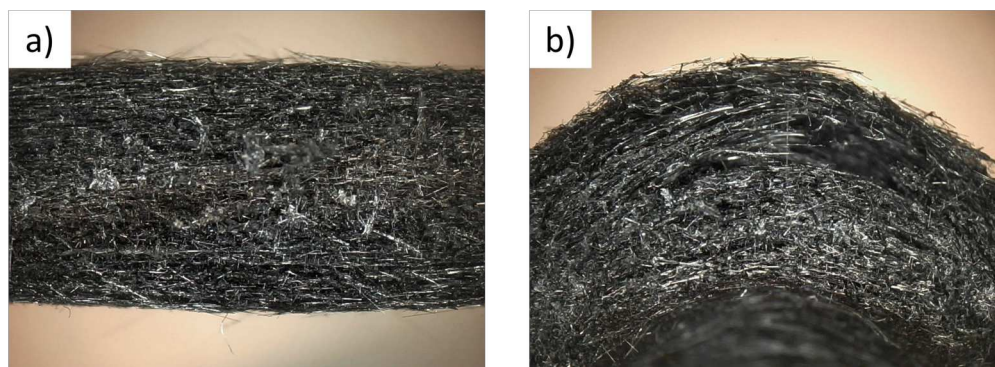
Sample cut surfaces a) heated but not formed b) heated and formed
